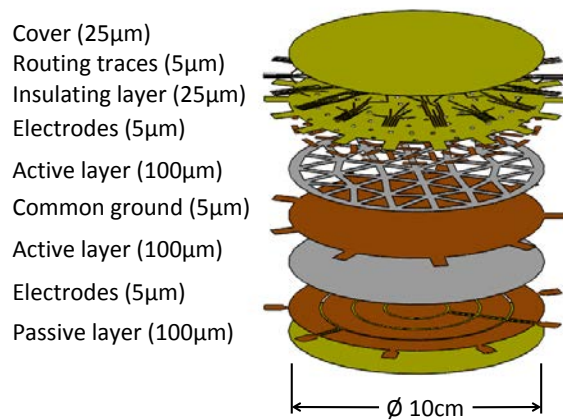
Exploded View of the Proposed 10cm Prototype Mirror.
